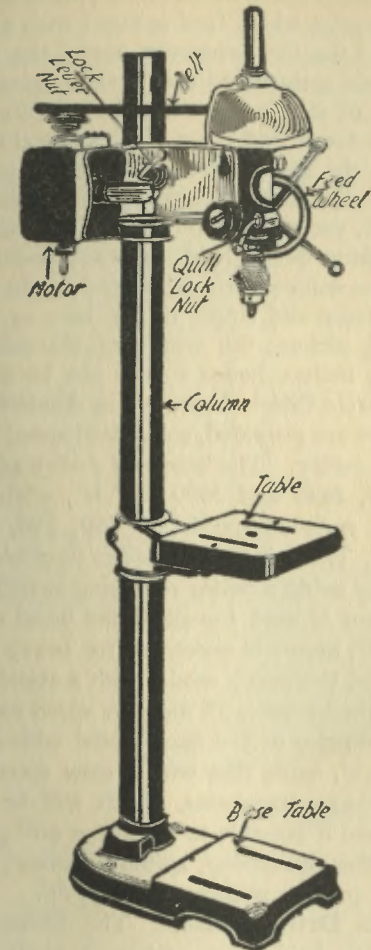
THE DRIVER BALL BEARING PEDESTAL DRILL PRESS
